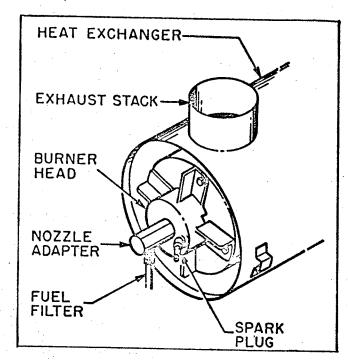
Burner Head, Spark Plug, and Fuel Filter
